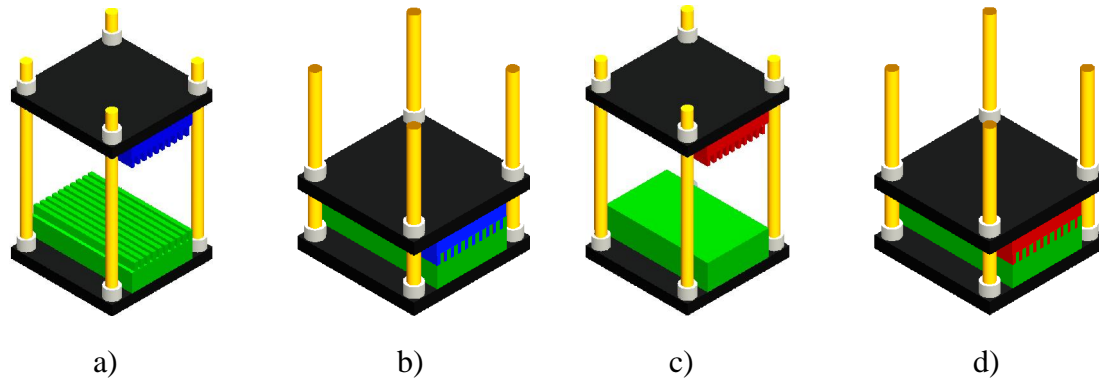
Hot Embossing process involving several sequential stages: a) mold preheating, b) embossing c) cooling, and d) mold opening.
